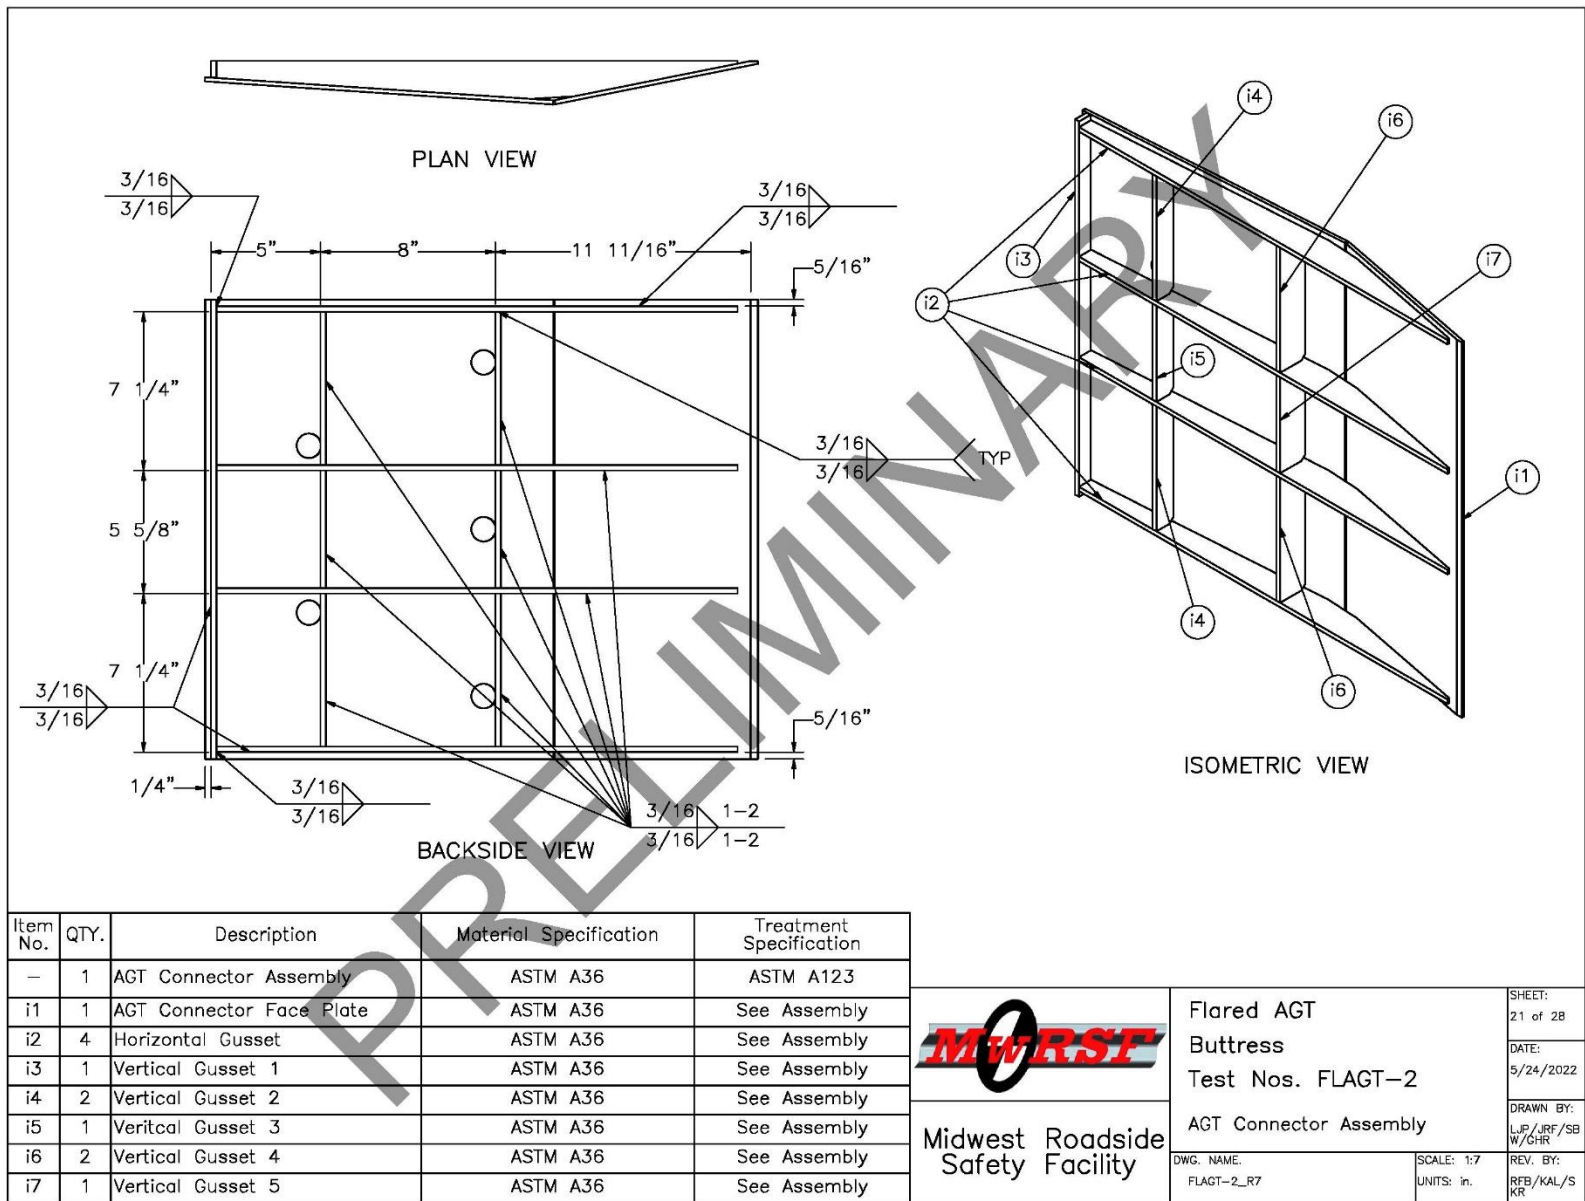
AGT Connector Assembly, Test No. FLAGT-2
